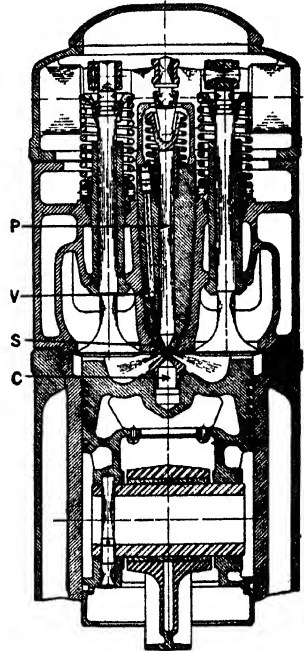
Section through Cummins combustion chamber, fuel injection nozzle, and valves.
